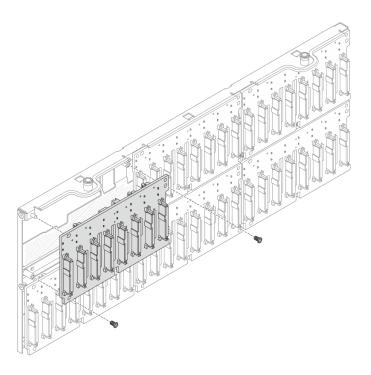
Removing backplane from carrier (2.5-inch bay chassis)
